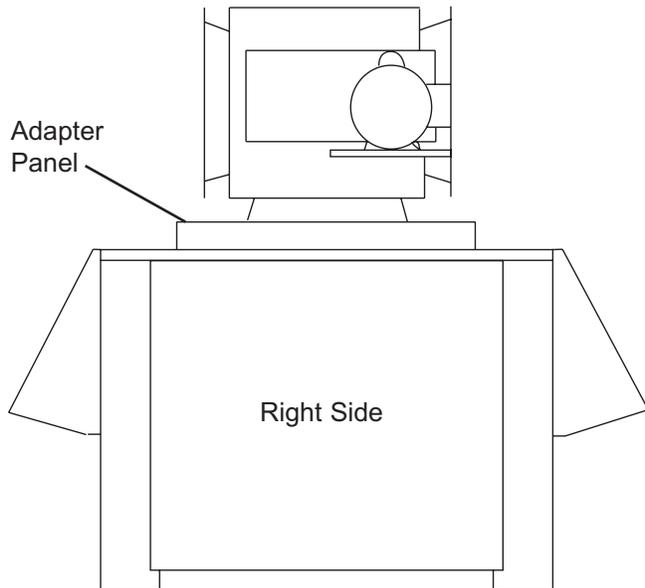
Draft Assembly Mounting, Models 2100-4001
